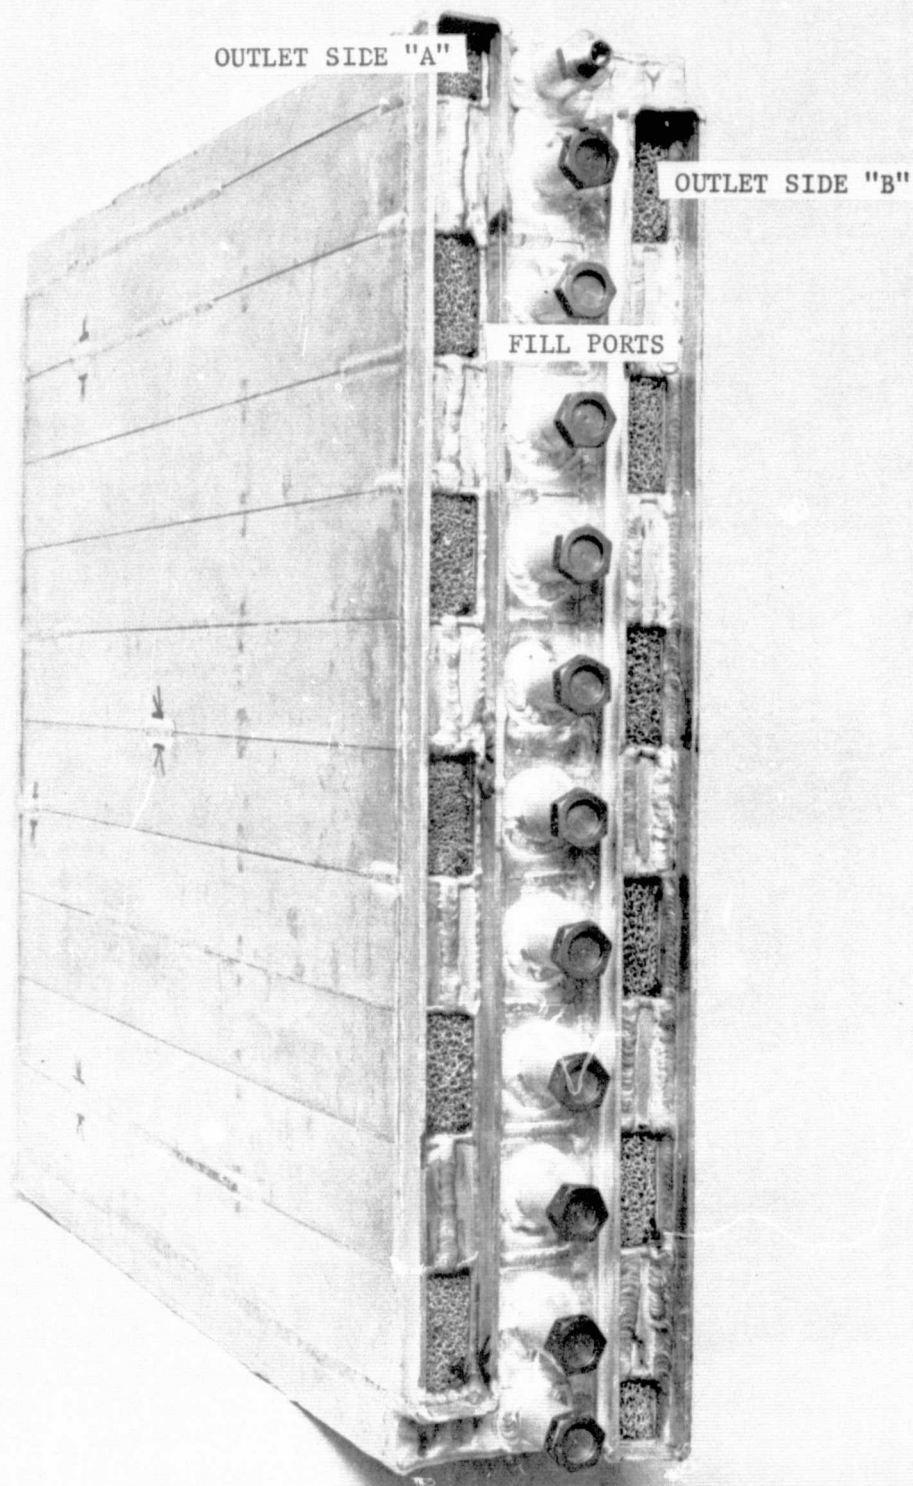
COMPLETED CANISTER CORE (SHOWING OUTLET END AND OTHER SIDE)
